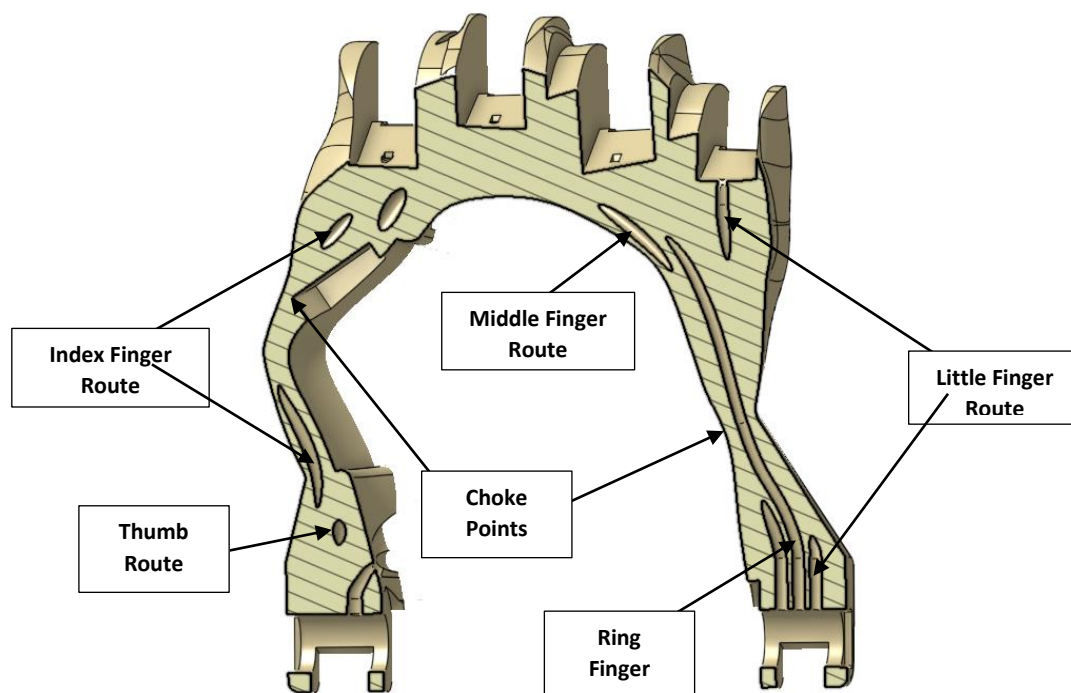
Section view of Palm Highlighting the New Fishing Wire Routes
